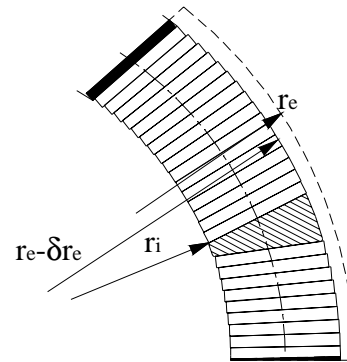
When coil layers are squeezed, the outer radius has a dimension inferior to the nominal one ($r_e - \delta r_e$), while the inner radius (r_i) is fixed by the winding mandrel of the curing mould.
